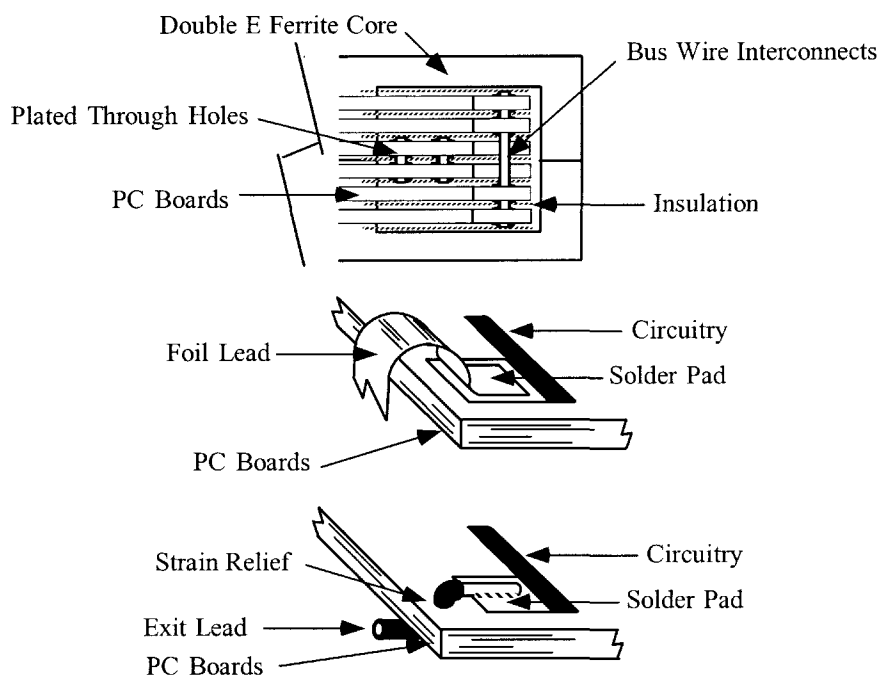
PC Winding Boards, Showing Interconnections and Exit Leads.
